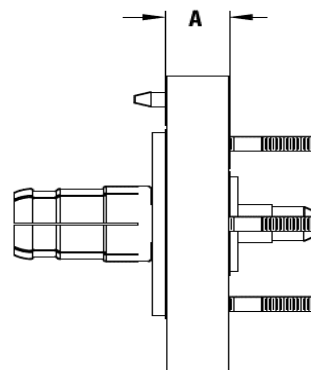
ohm, 3-1/8-inch EIA flange to 1-5/8-inch EIA flange includes two inner connectors. 1-5/8-inch inner connector is removable and mates with captivated 1-5/8-inch inner connectors.
